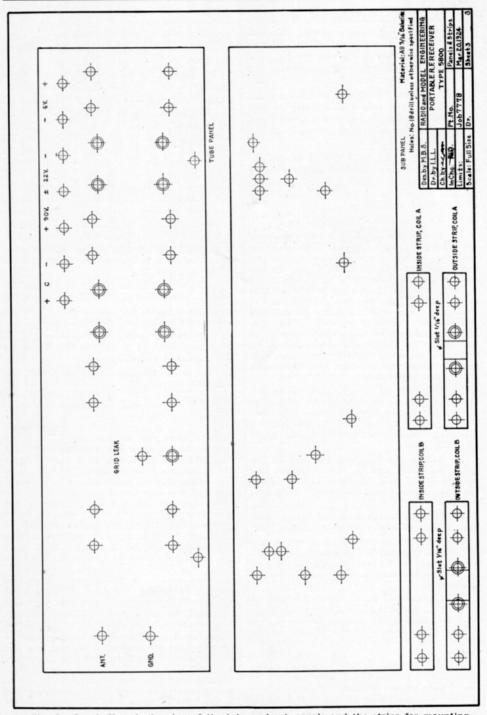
One-half scale drawing of the tube and sub panels and the strips for mounting the fikits.
